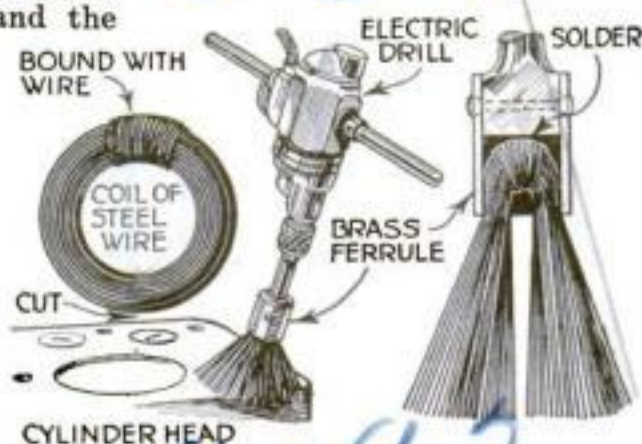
This electrically driven scratch brush of simple construction makes carbon removal an easy task
